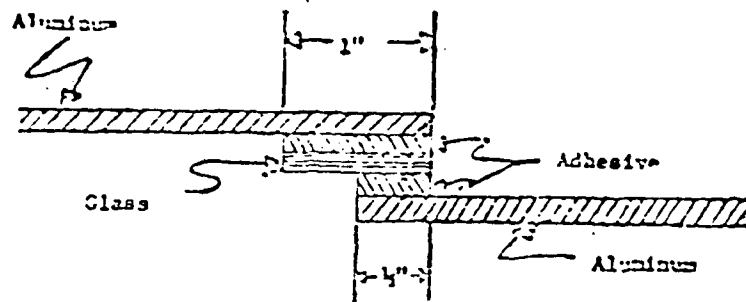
ASSEMBLY OF SHEAR SPECIMENS
